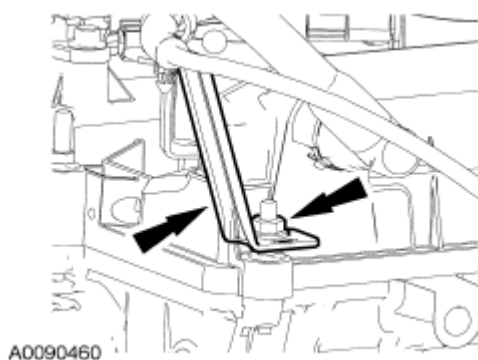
Locating Accelerator Control Cable, Bracket & Nut
